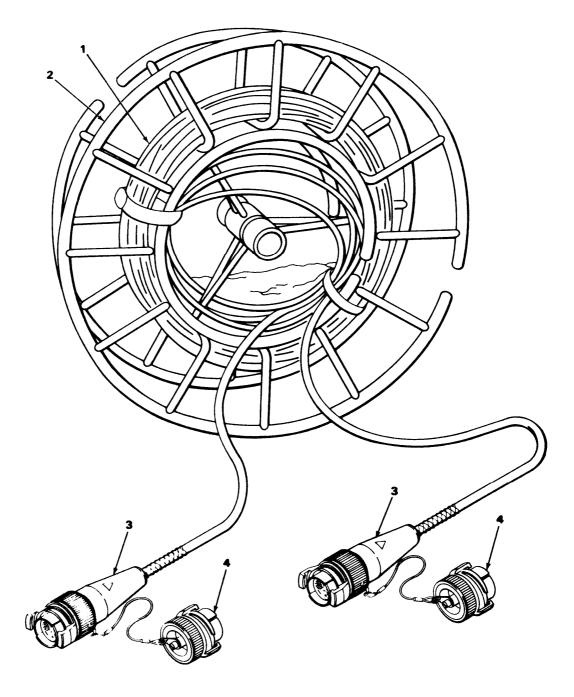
CABLE ASSEMBLY, SPECIAL PURPOSE, ELECTRICAL CX-11230A/G (100 FEET).
